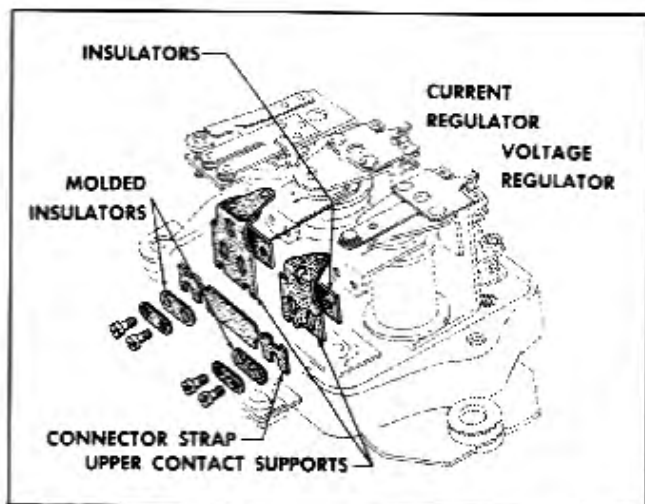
Regulator Contact Mounting—Standard and Air Conditioning Regulator
